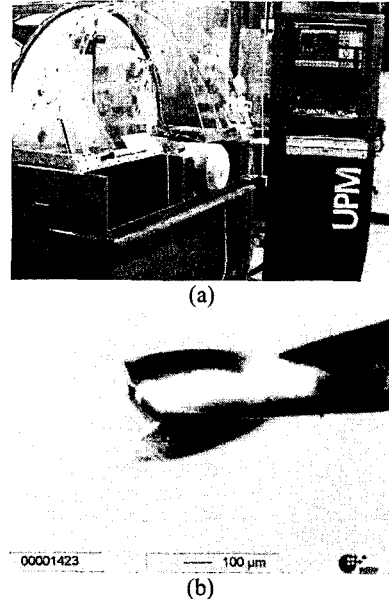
Manufacturing system<sup>(17)</sup>: (a) the ultra-precision milling machine; (b) 500  $\mu\text{m}$ -diameter tool tip
